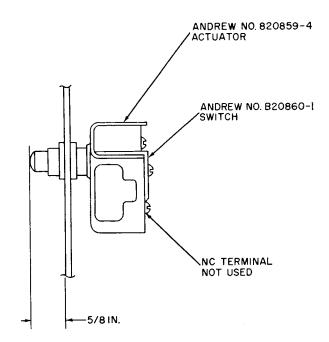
PANEL SWITCH ASSEMBLY
